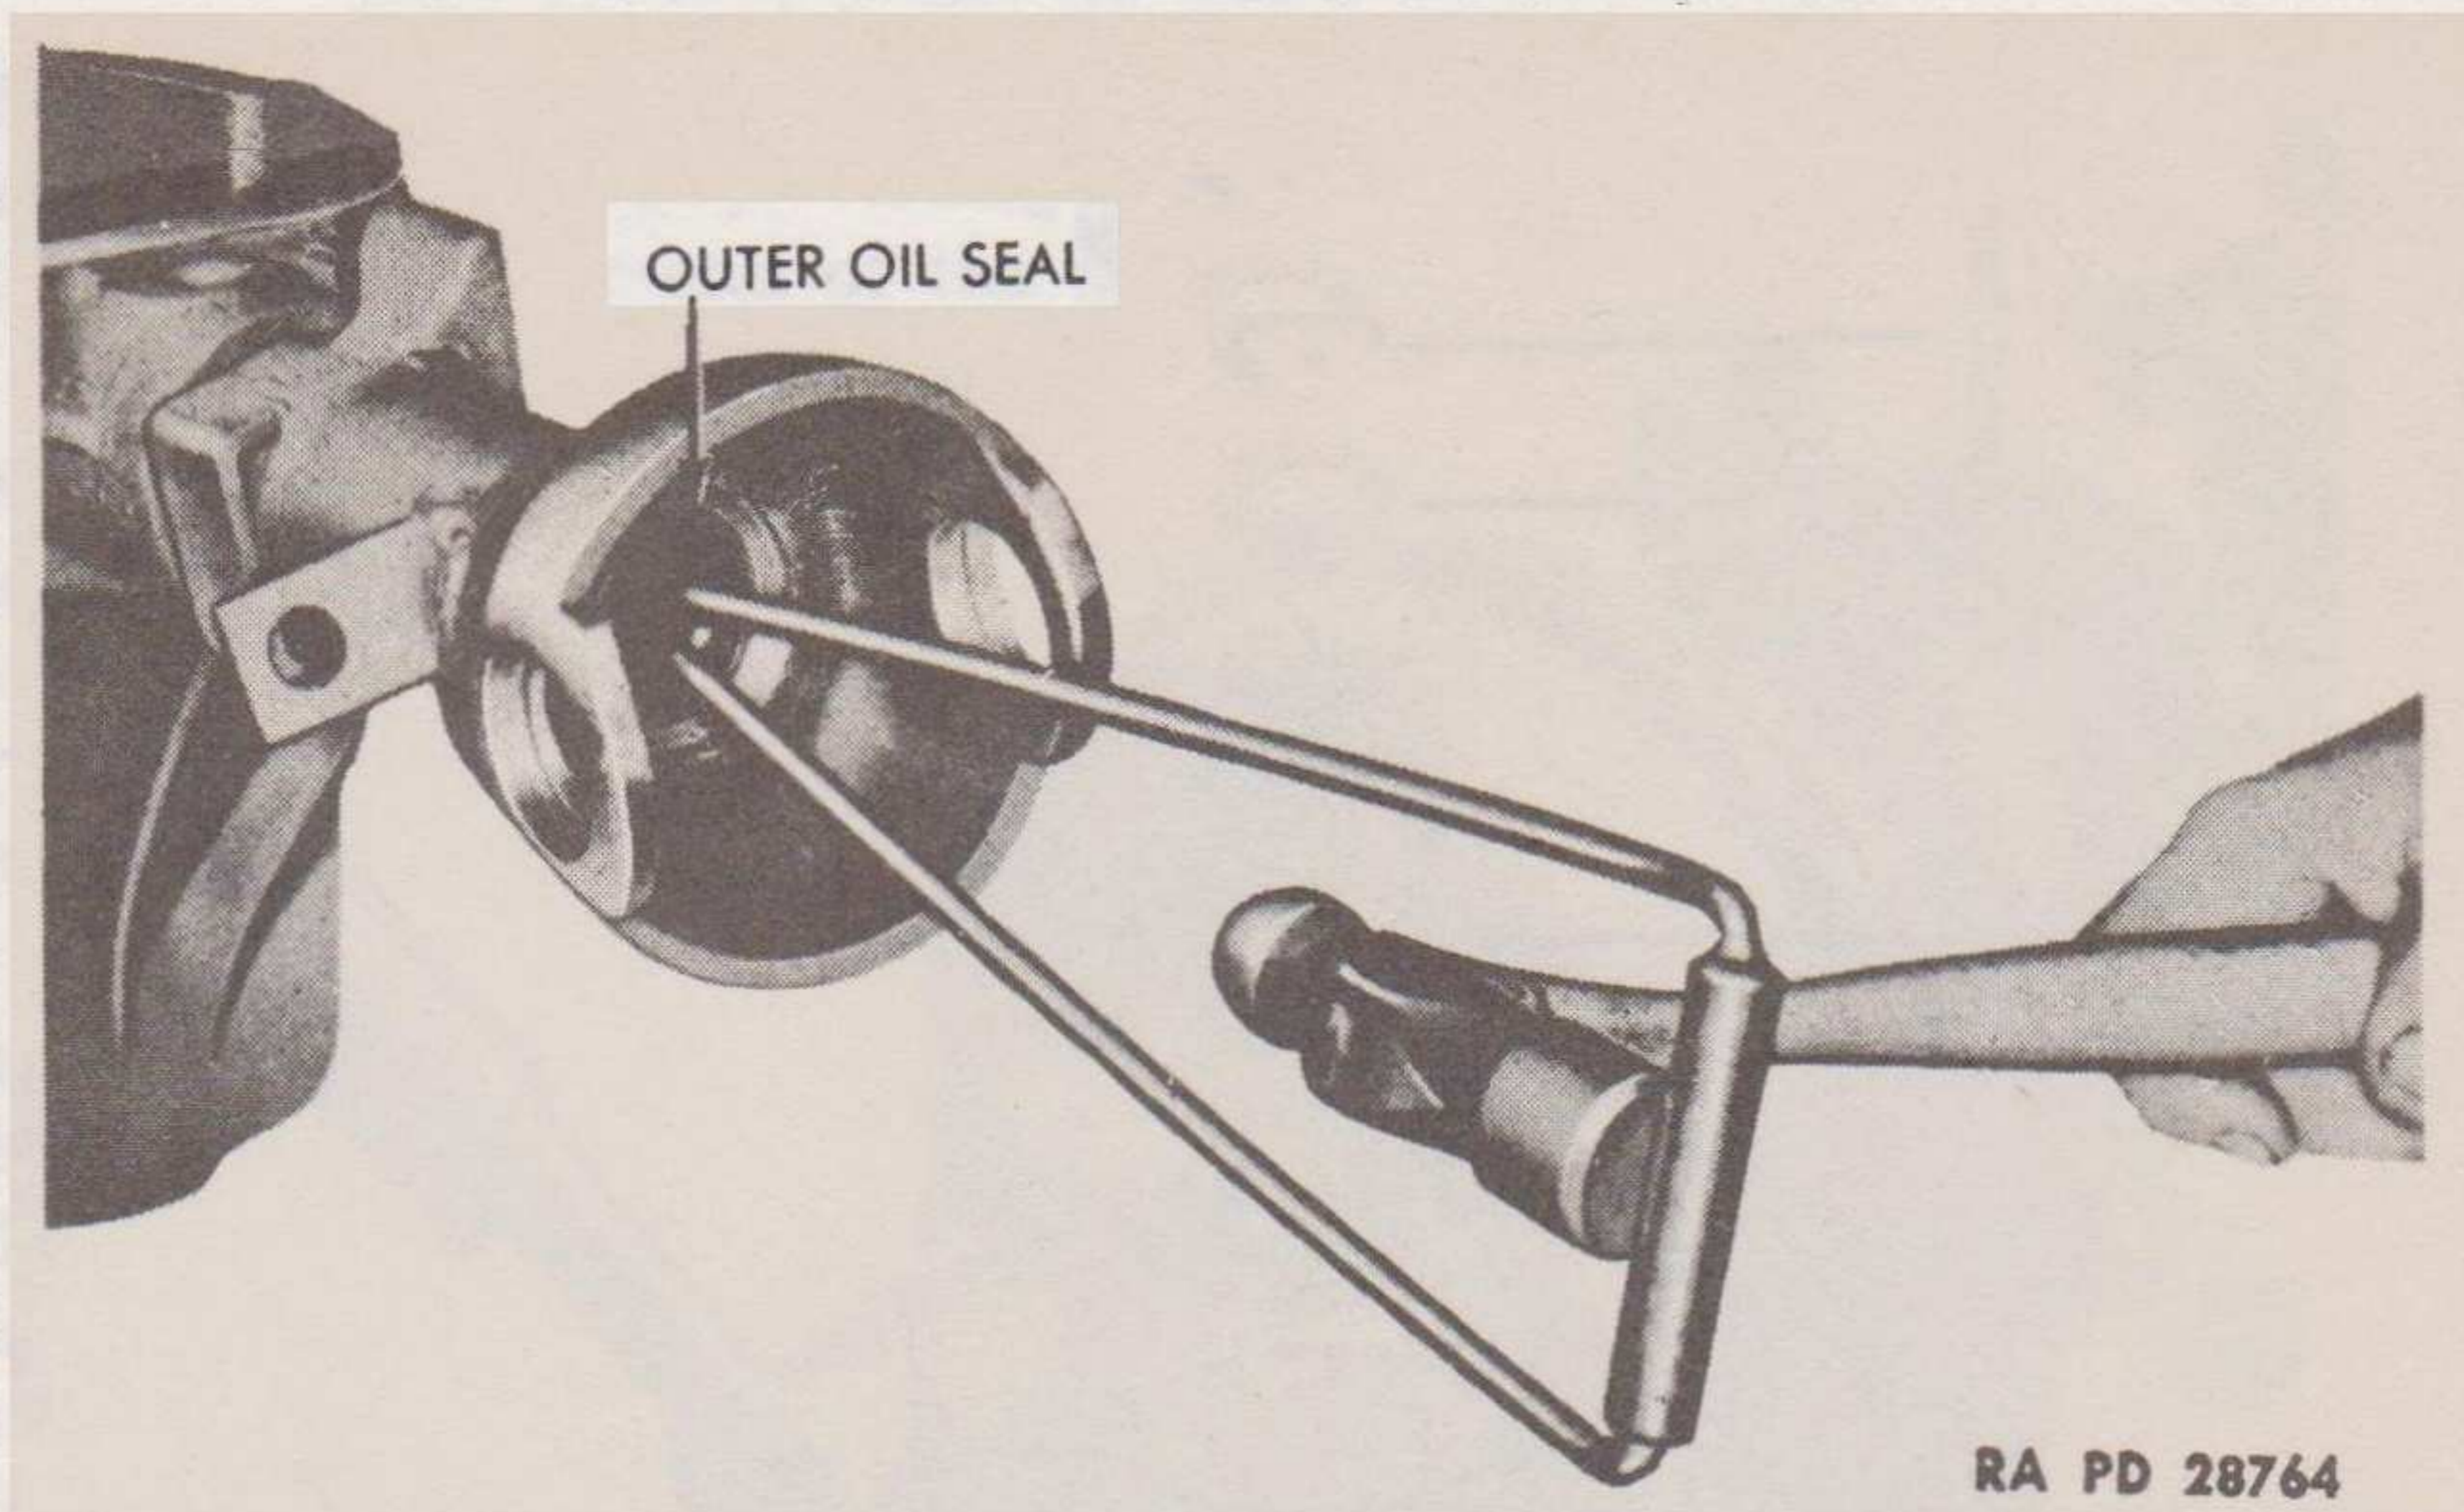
Removing Oil Seal From Outer End of Axle Housing With Remover 41-R-2384-38
